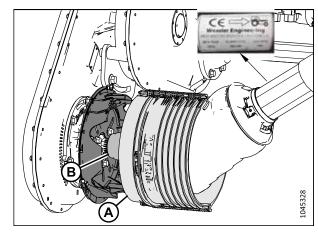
Driveline Installed on Float Module Gearbox Shaft
